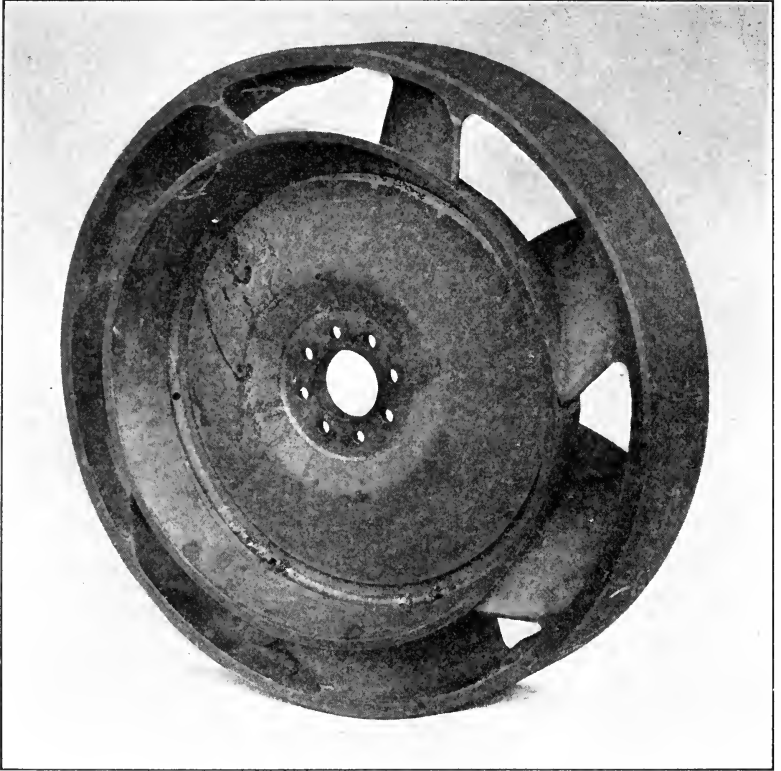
Typical Fly Wheel Showing Female Member of Cone Clutch and Fan-Blade Spokes. Rim is Light Because of Large Diameter.
